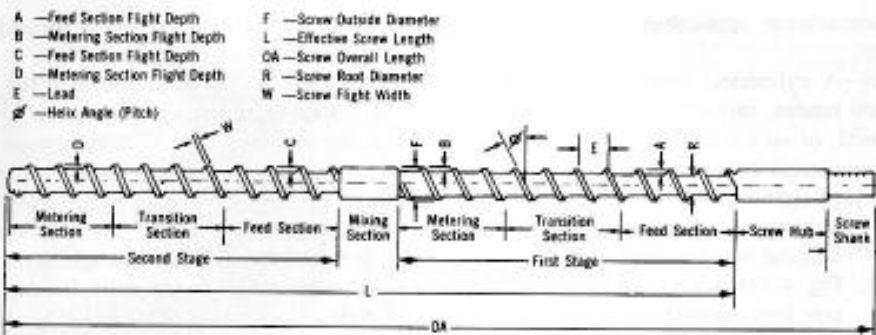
Single flight, two-stage extrusion screw with mixing section.
